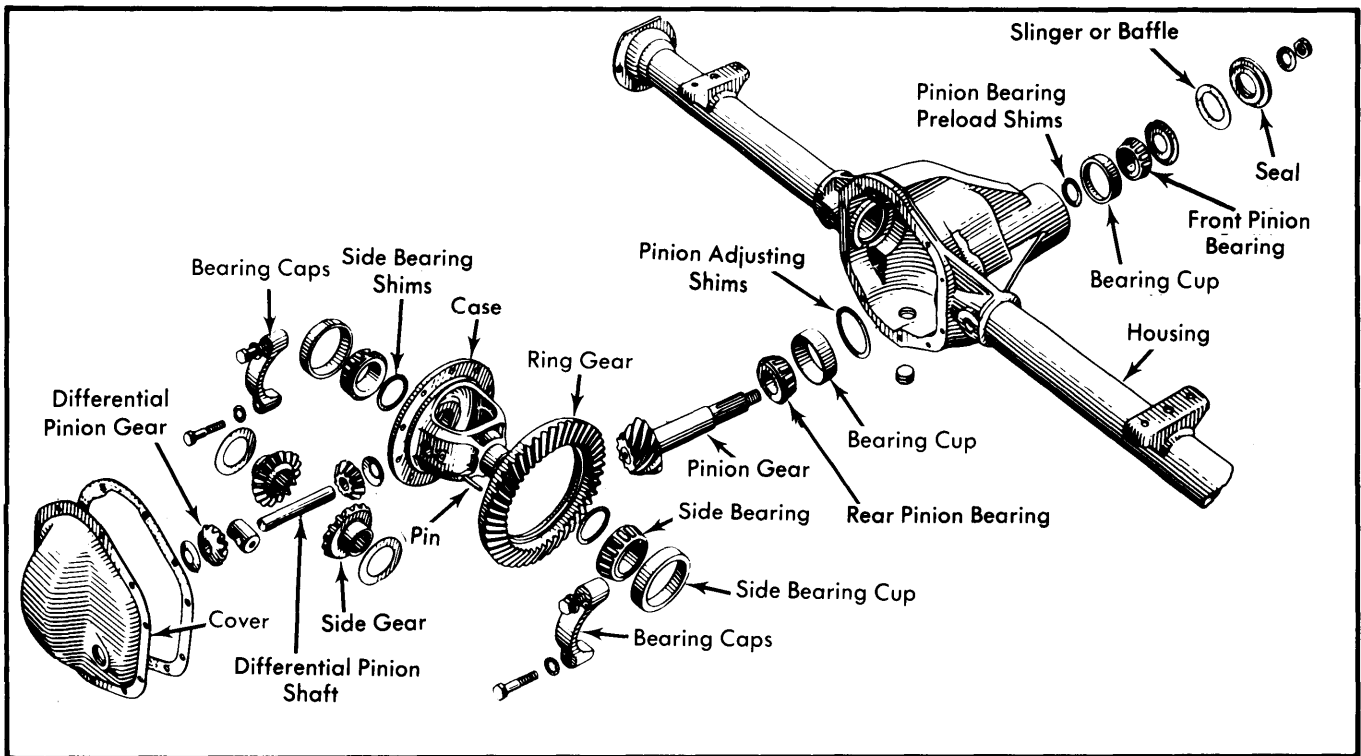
Exploded View of Spicer (Dana) Full-Floating Axle Assembly (One-Piece Differential Shown)
